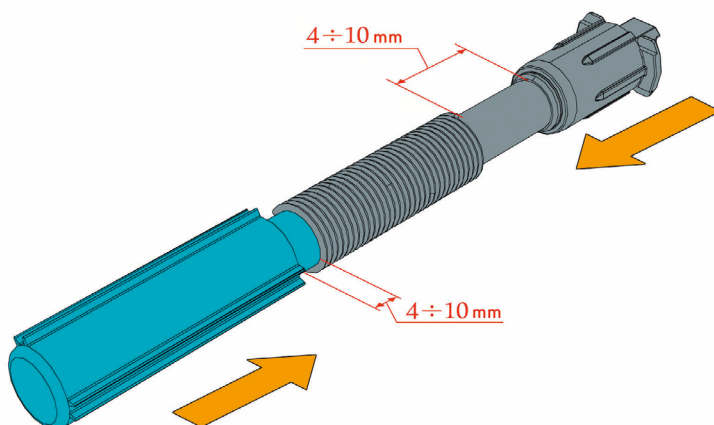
M-OP bearing and M-BRS brake assembly
